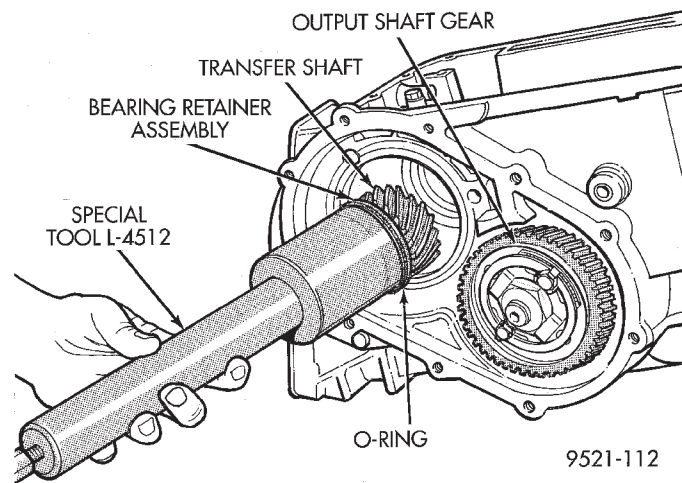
Remove or Install Transfer Shaft and Bearing Retainer Assembly Using Tool L-4512
